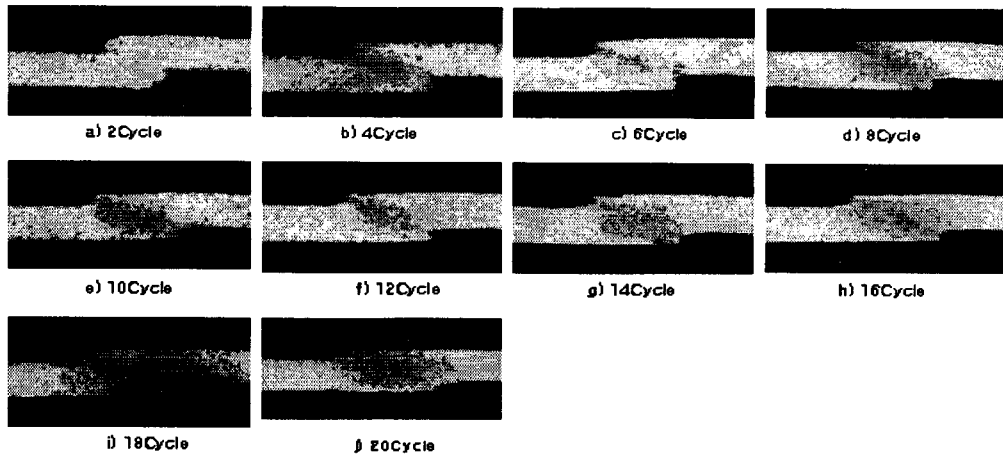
A welded joint macro section by welding time(8000A, 200kgf)
